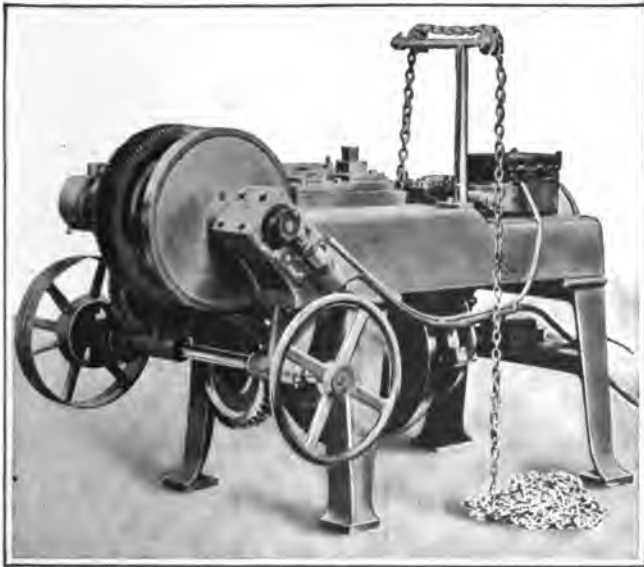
Machine used for Manufacture of Electrically Welded Plain-link Chain, showing Welding Apparatus
